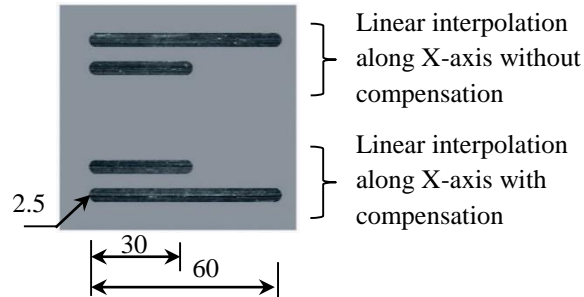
Geometry for X-axis travel machined component (All dimensions are in mm)
